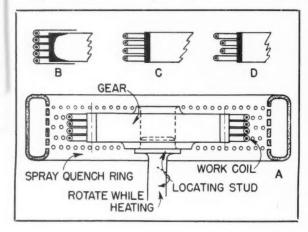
Sketch of a typical spray quench fixture used for hardening spur gears.
